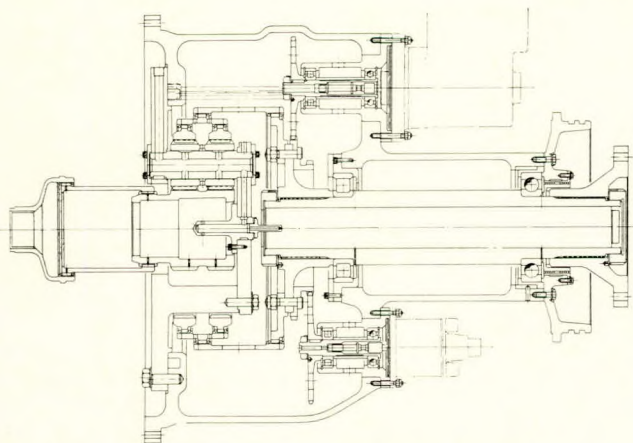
Cross-sectional arrangement of the Proteus primary gear
